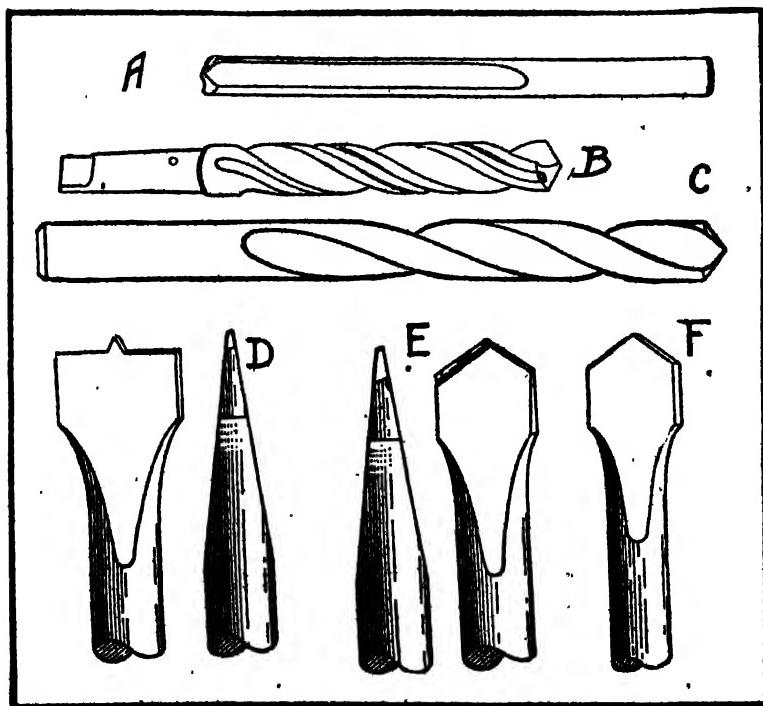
Forms of Drills Used in Hand and Power Drilling Machines.
